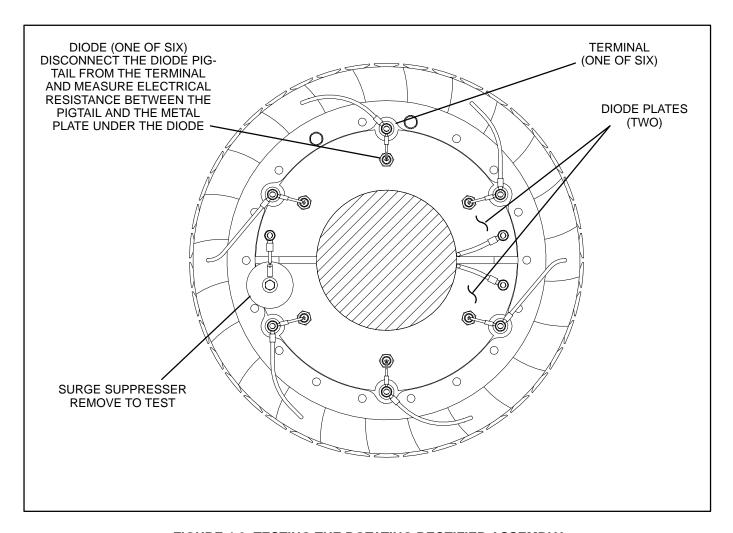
TESTING THE ROTATING RECTIFIER ASSEMBLY
